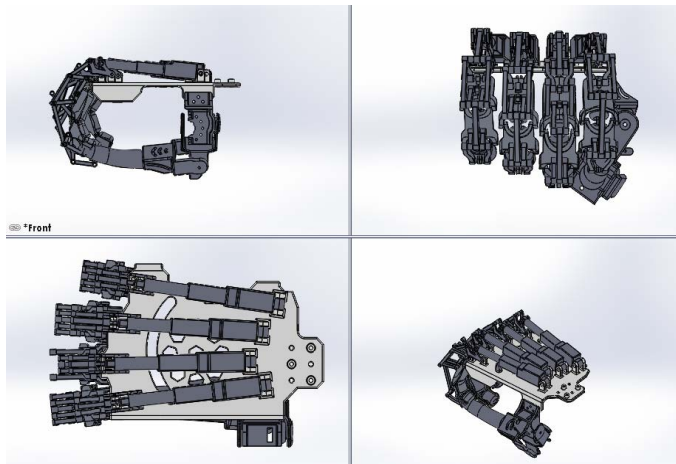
3D CAD model Assembly of the proposed wearable robot
